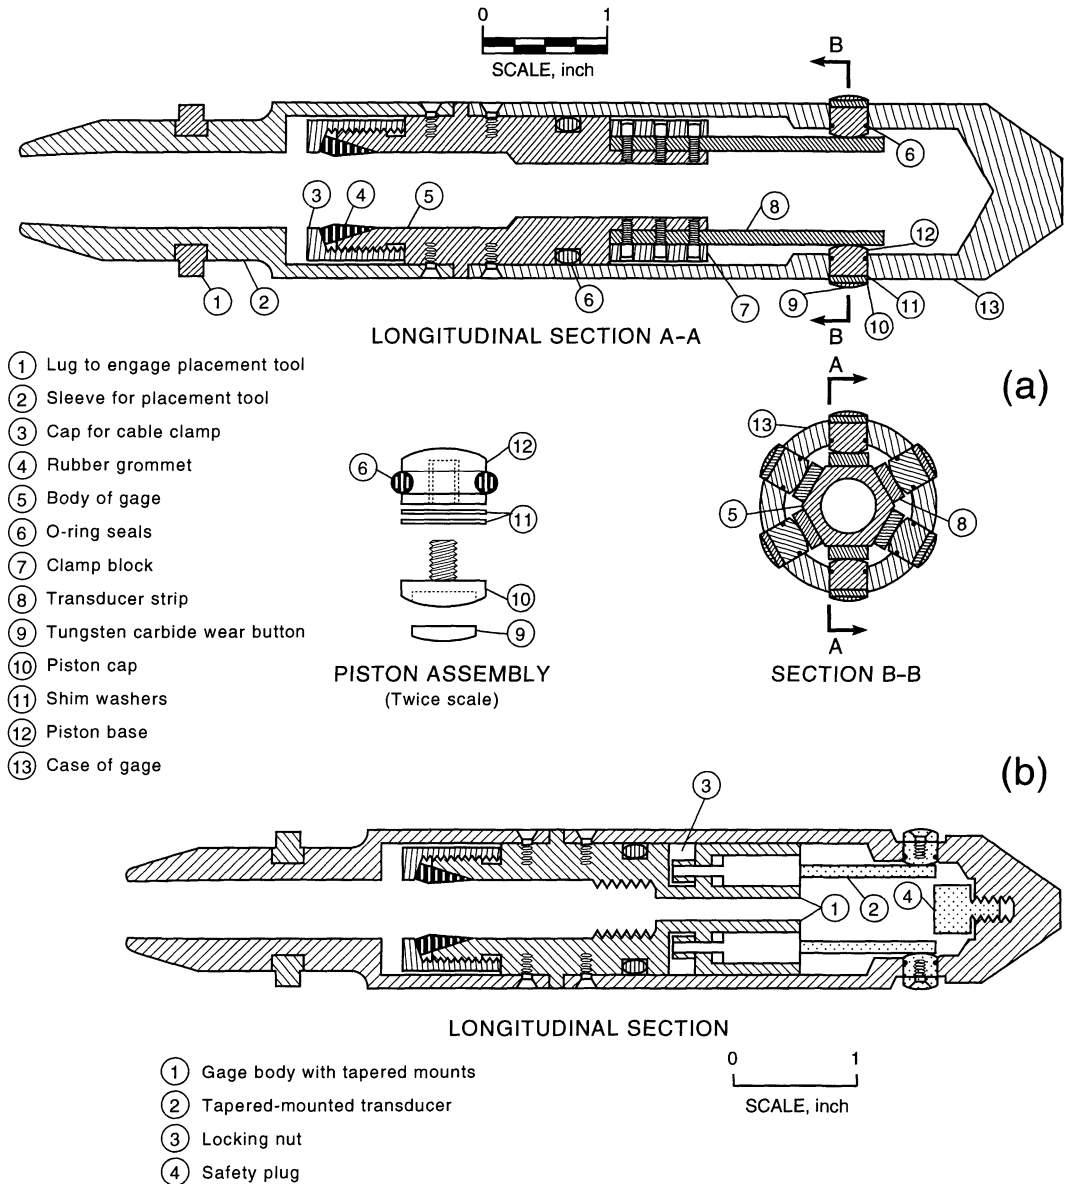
(a) Drawing of principal parts of the three-component USBM gage. (After Merrill, 1967.)
